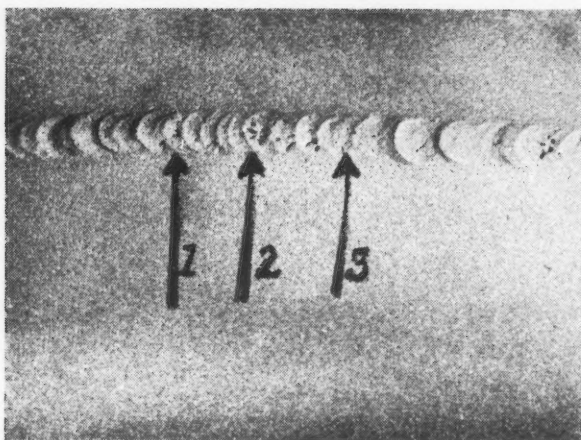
Typical example of porosity in a gas flame seam weld caused by poor welding technique.
